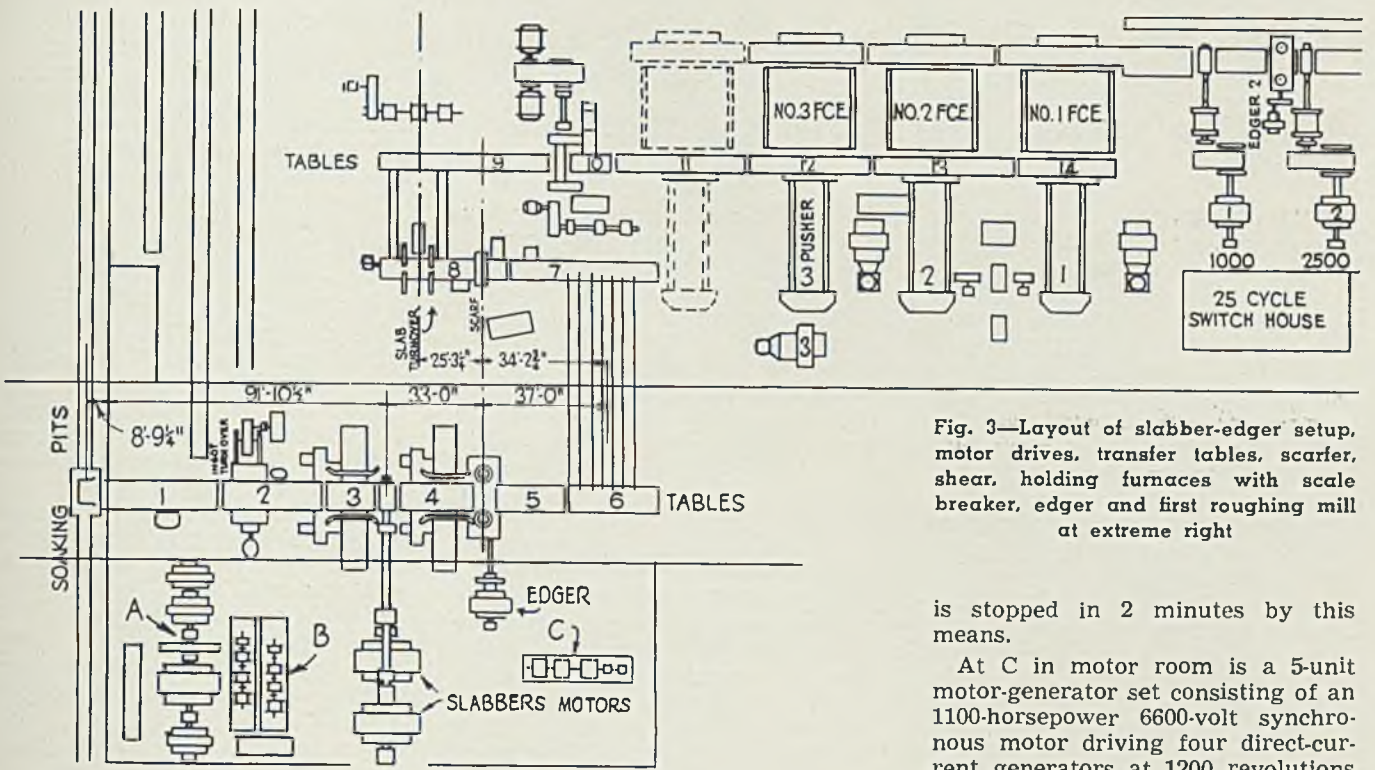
Layout of slabber-edger setup, motor drives, transfer tables, scarfer, shear, holding furnaces with scale breaker, edger and first roughing mill at extreme right
